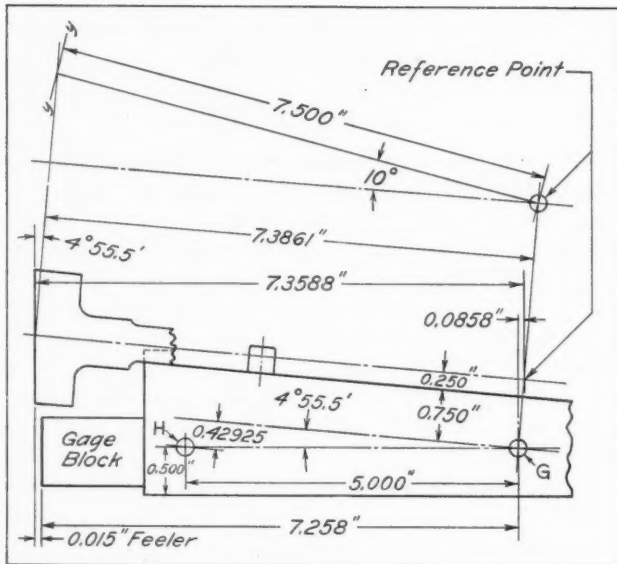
Wing-hinge Forging in Fig. 4 is Shown Here Located on Sub-base Angle-plate, Ready for Machining. Construction Pin Holes Facilitate Alignment for Machining, and Checking of Finished Compound-angle Surface
